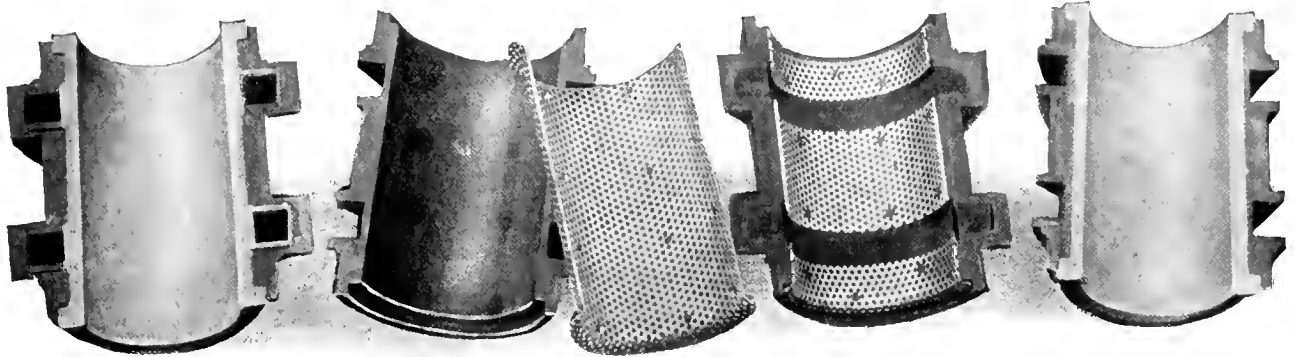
Glyco Bearings of the Plain and Oil Ring Type, Before and After Babbitting.
